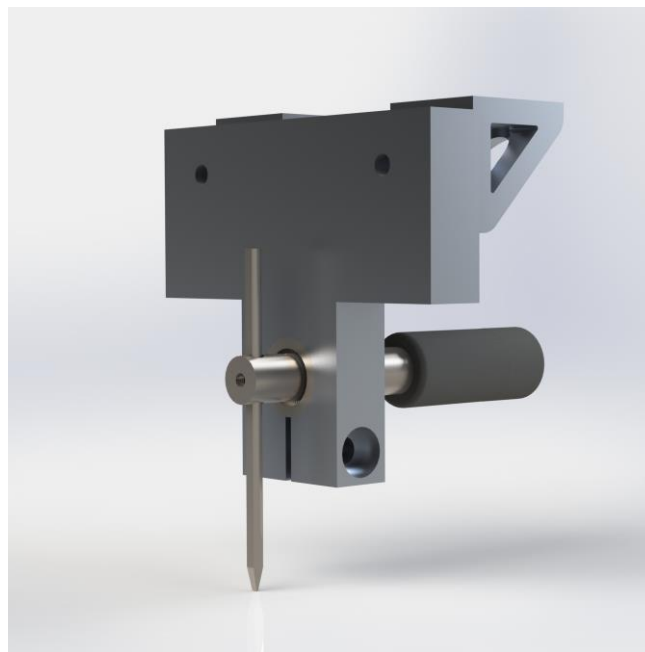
Solidworks Render of the Bonding Tool Subsystem
